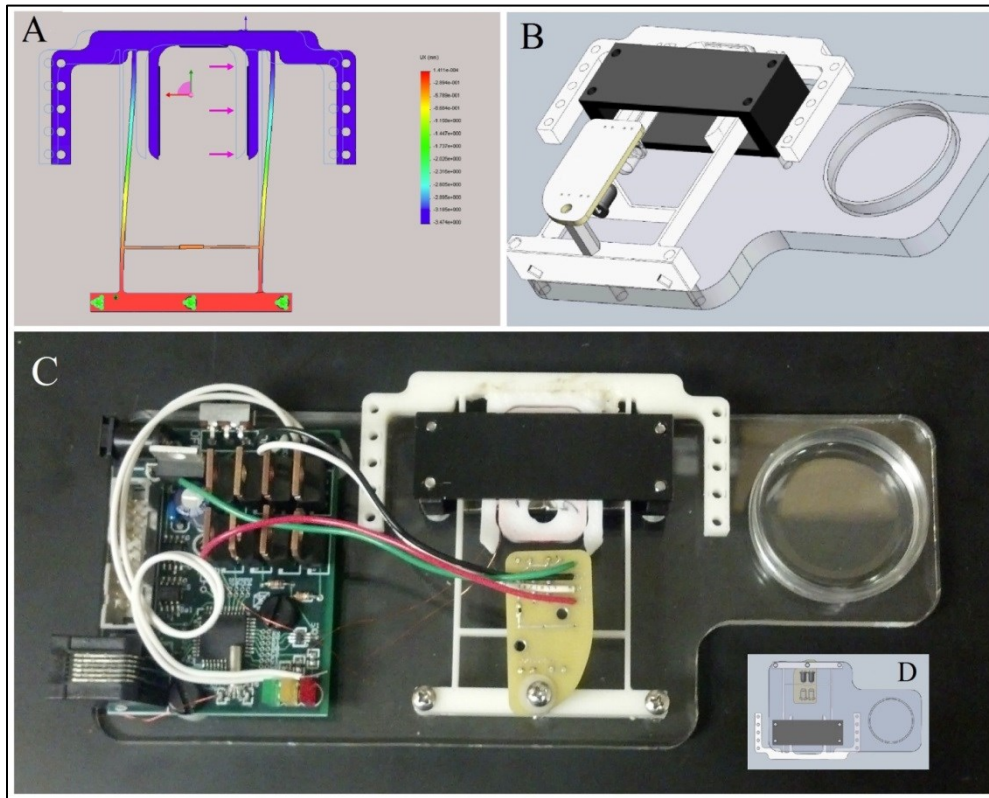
(A) SolidWorks motion study for the design of the flexible frame (B) Assembly of the VCA mechanical design (C) Image of complete bioreactor hardware (D) Inverted view of SolidWorks Assembly
